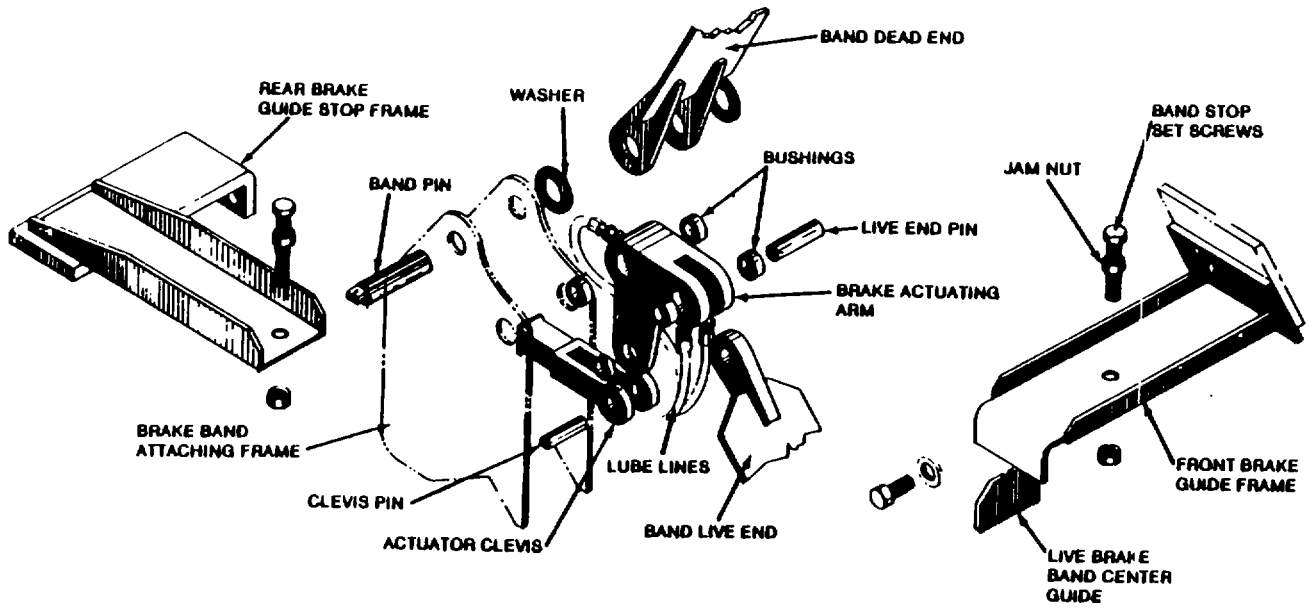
Brake Actuating Arm Assembly and Disassembly.
